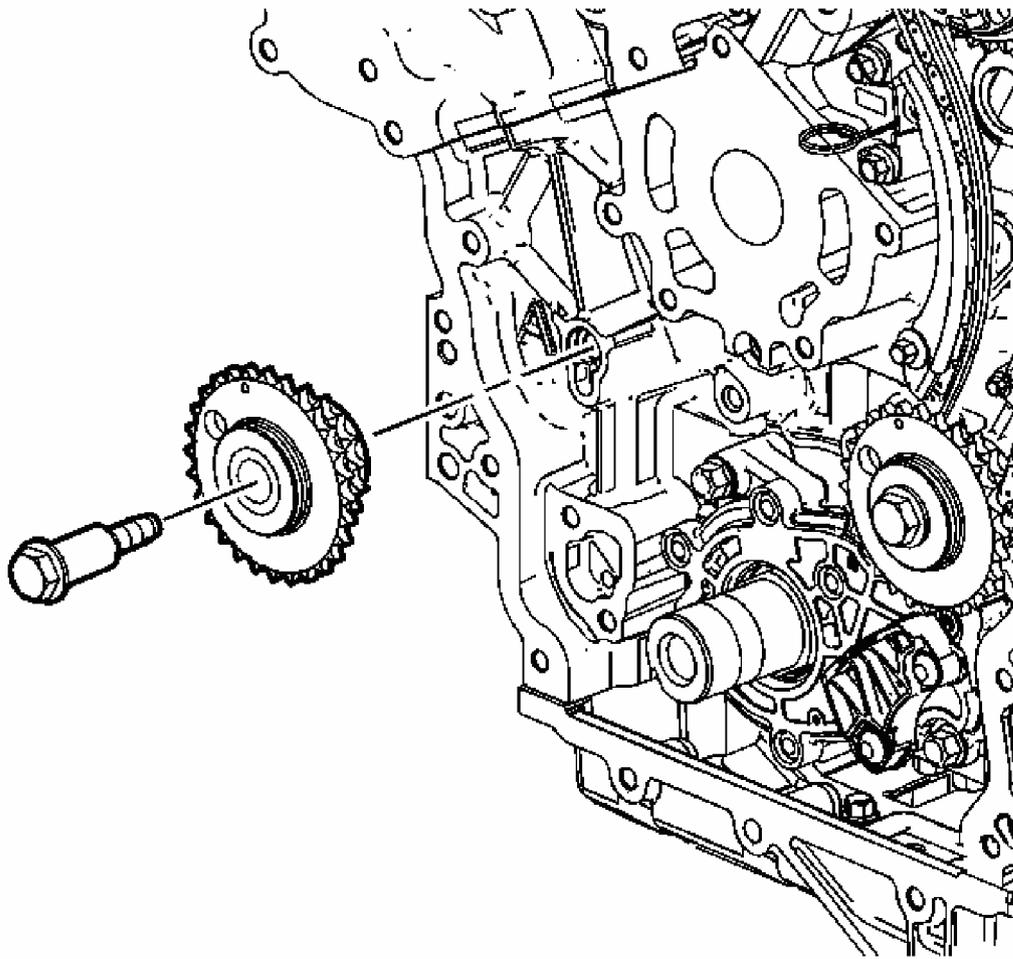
View Of Right And Left Camshaft Intermediate Drive Chain Idlers
